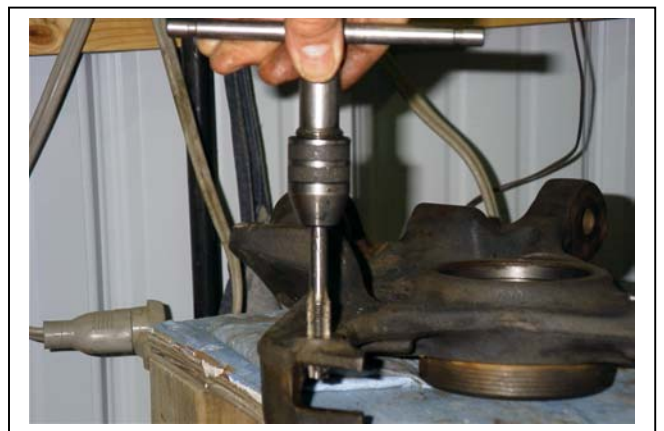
Caliper mounting bolt/pin hole threads being chased/cleaned.
